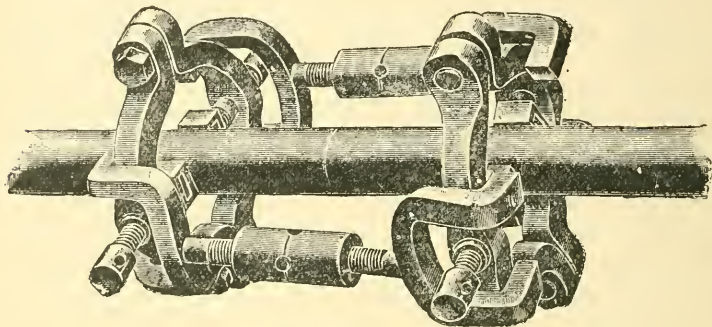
The clamps used for welding tubes up to four inches in diameter.
